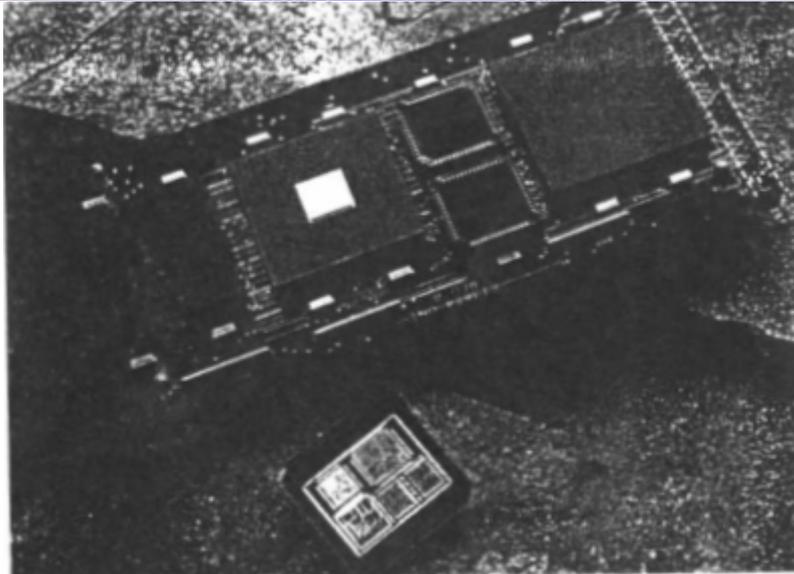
High-speed RISC/SPARC processor using multichip design with silicon circuit board
